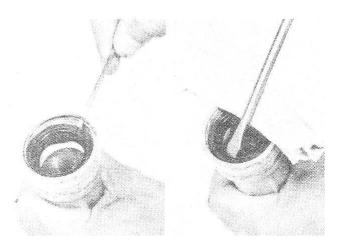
On YT 175/225 models, carefully pry out the seal retaining clip (left), then remove the seal with a large screwdriver (right) (Sec 5)
